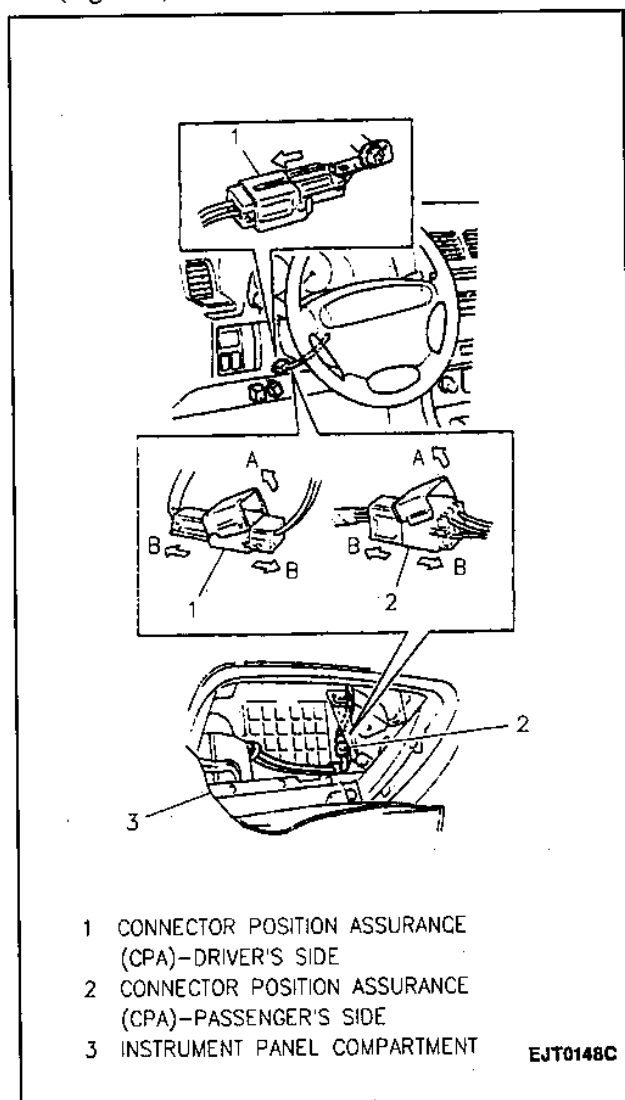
SIR Driver and Passenger Inflator Module Connectors—(Location)
